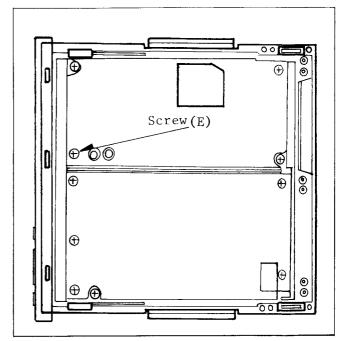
Opening of PCBs (Bottom, Front, Potentiometer)-(1)
